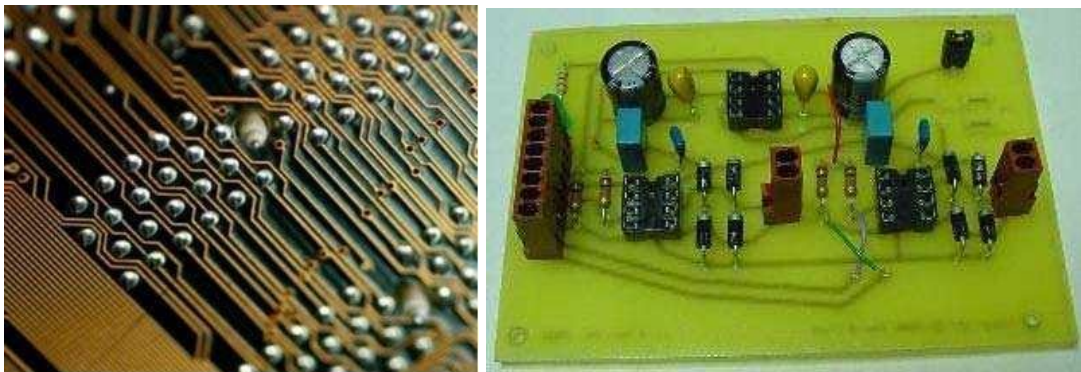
(a) Close-up photo of one side of a motherboard PCB, (b) The smaller components mount on single-side PCB. (Mariamadzliza et al., 2005).
